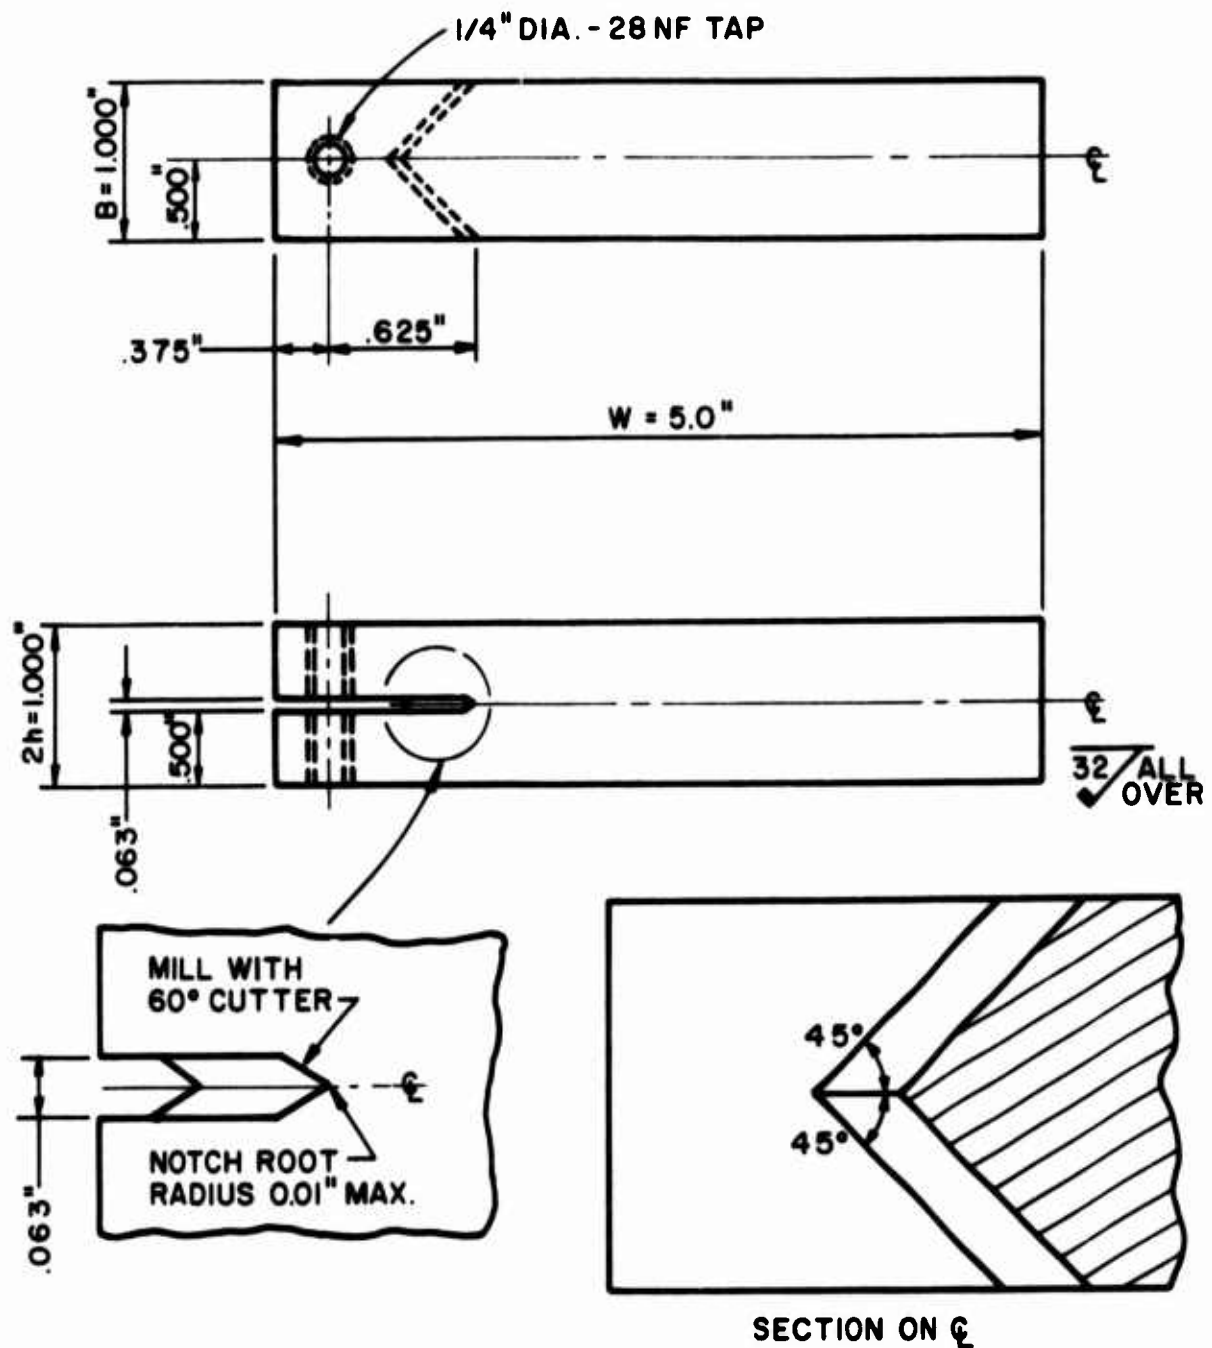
CONFIGURATION OF DOUBLE CANTILEVER BEAM (DCB) SPECIMEN USED FOR SCC TESTS
